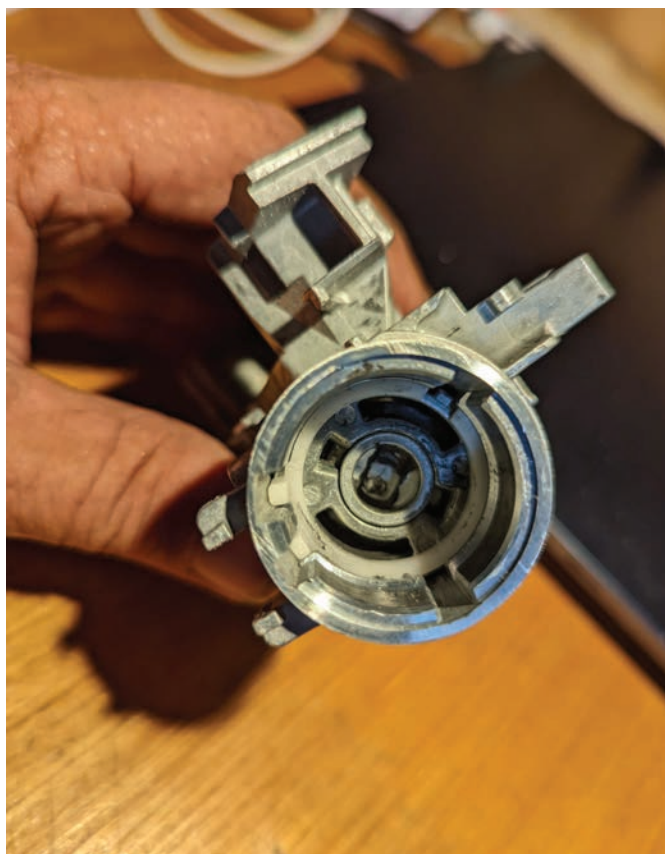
Here is a view of the white clip holding the assemblies inside the housing. The plastic is quite flexible, so don't worry about breaking it.
